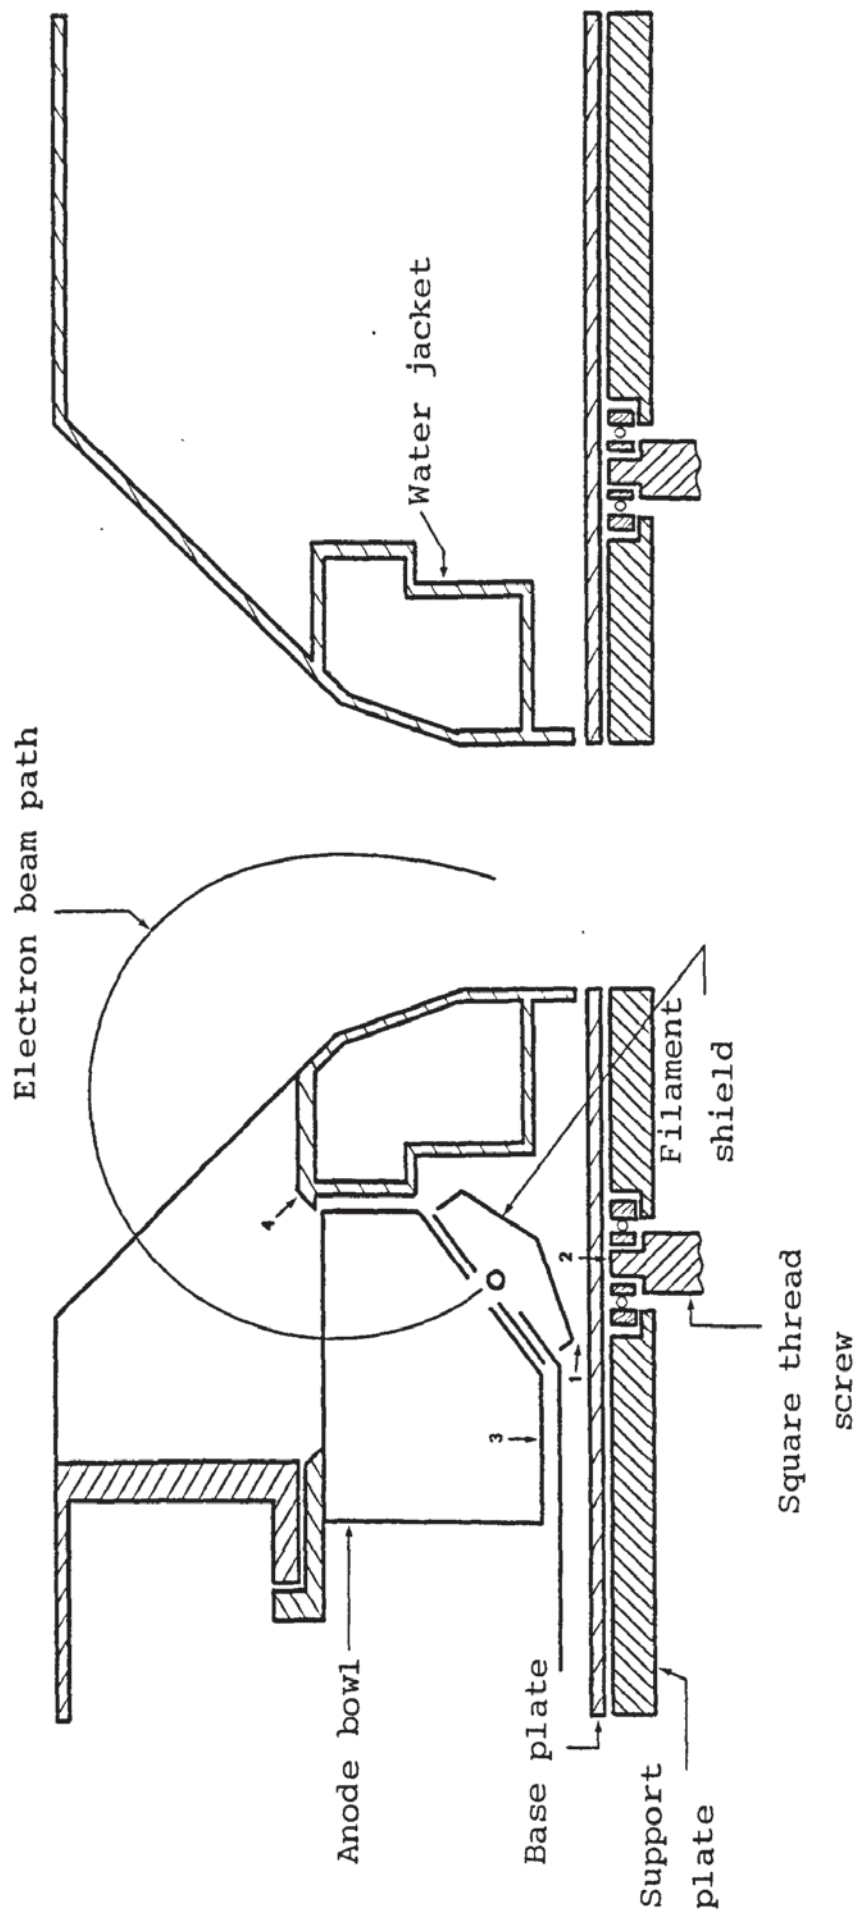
Assembly of the electron beam gun and the water cooled rod fed crucible.
